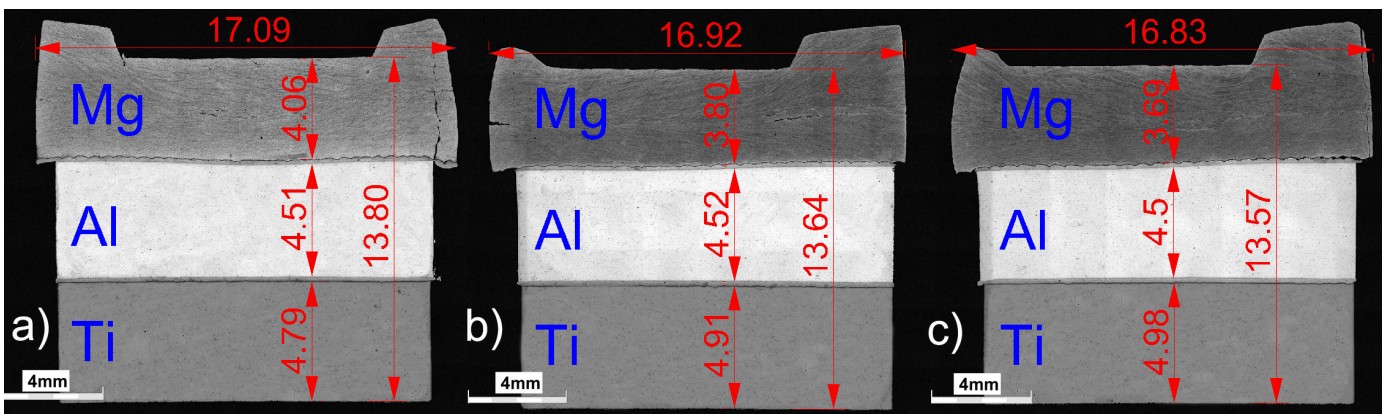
A view of the specimens cross-section after compression tests: a) 300°C, b) 350°C, c) 400°C
